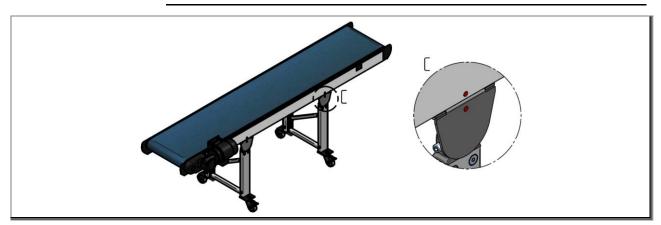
Overall construction assembly, conveyor with support AM 010 (typical)
